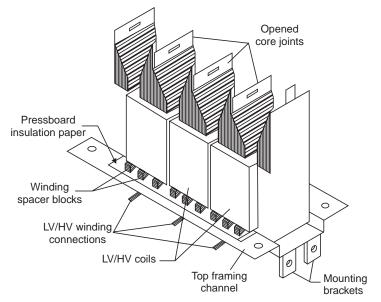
AMDT core/coil assembly (core joints open, LV/HV coils installed)
